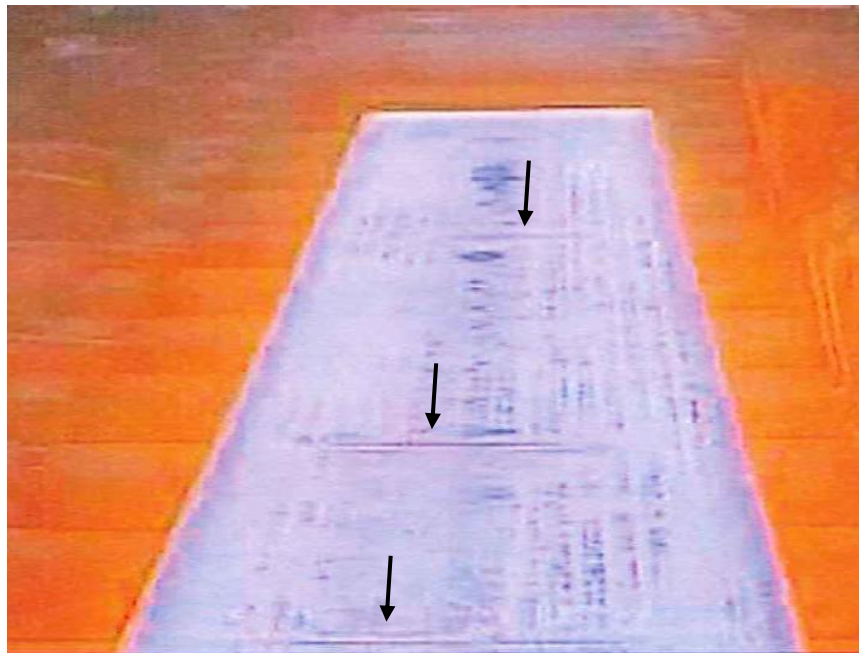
Surface cracking after slab discharge from reheating furnace
